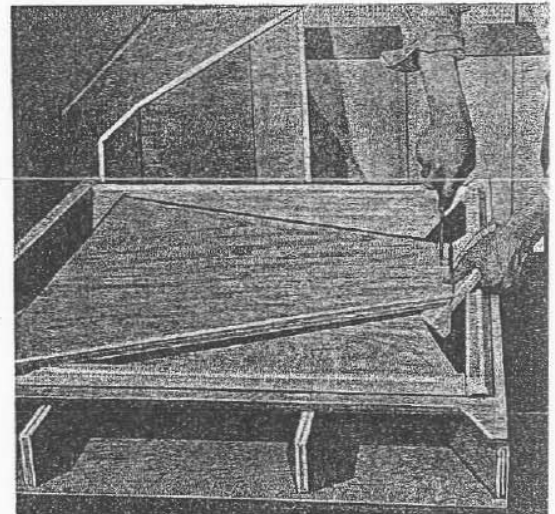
Screw parts 5, 6, 7 together for a "Dry Fit" check before gluing.
